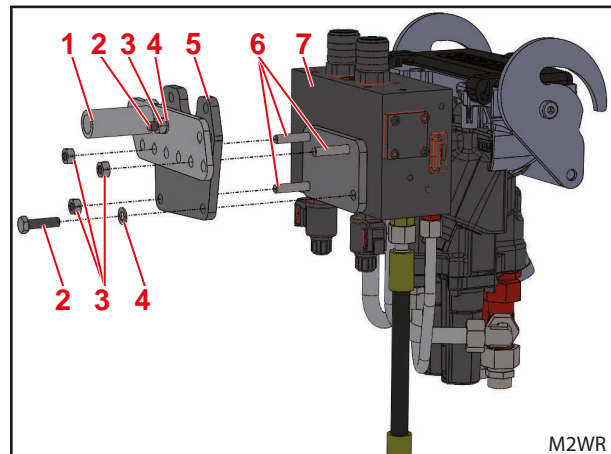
Installing the valves on the bracket of the right mounting part (mounting variant D)
